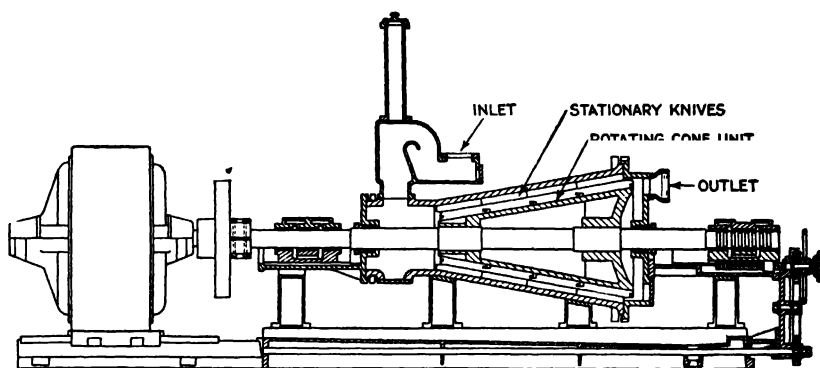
Jordan Engine. Courtesy E. D. Jones and Sons, Pittsfield, Mass.
